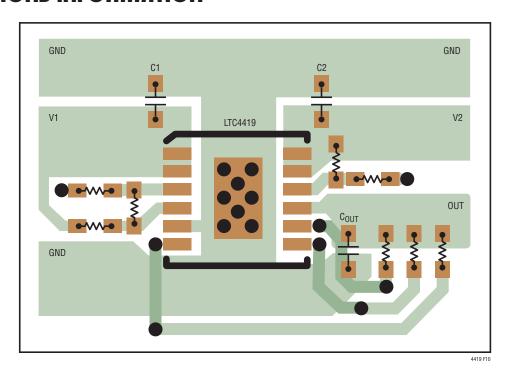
Recommended 12-Lead MSE Layout for a 2-Layer PCB
